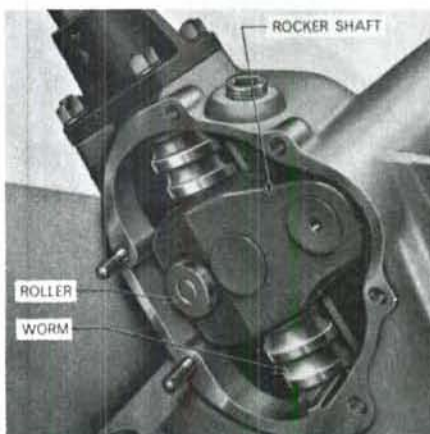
View of steering gear assembly with side cover removed. Roller moves in slot in side cover.
